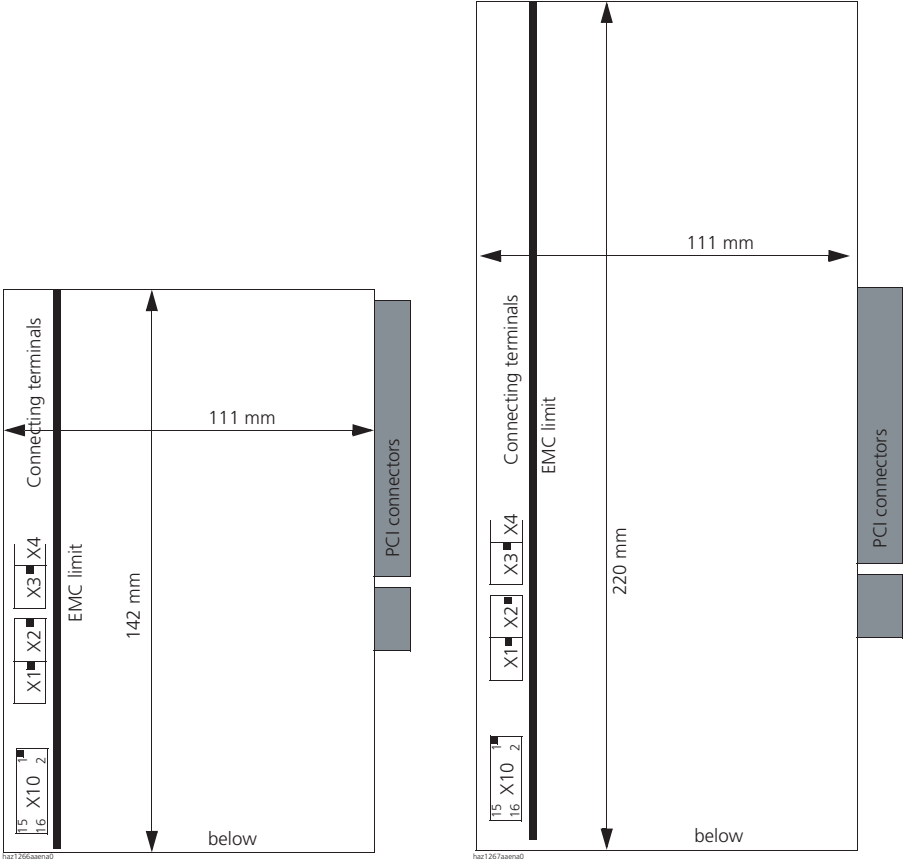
Dimensions, expansion card, type A (left) and type B (right)
